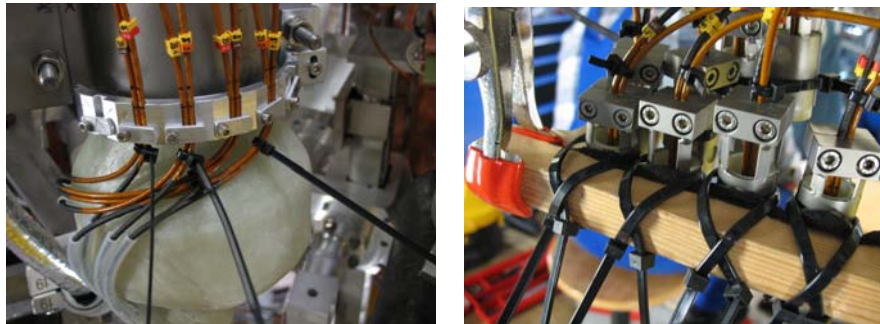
QD wires tested and correctly set (left), ready for casting (right).
